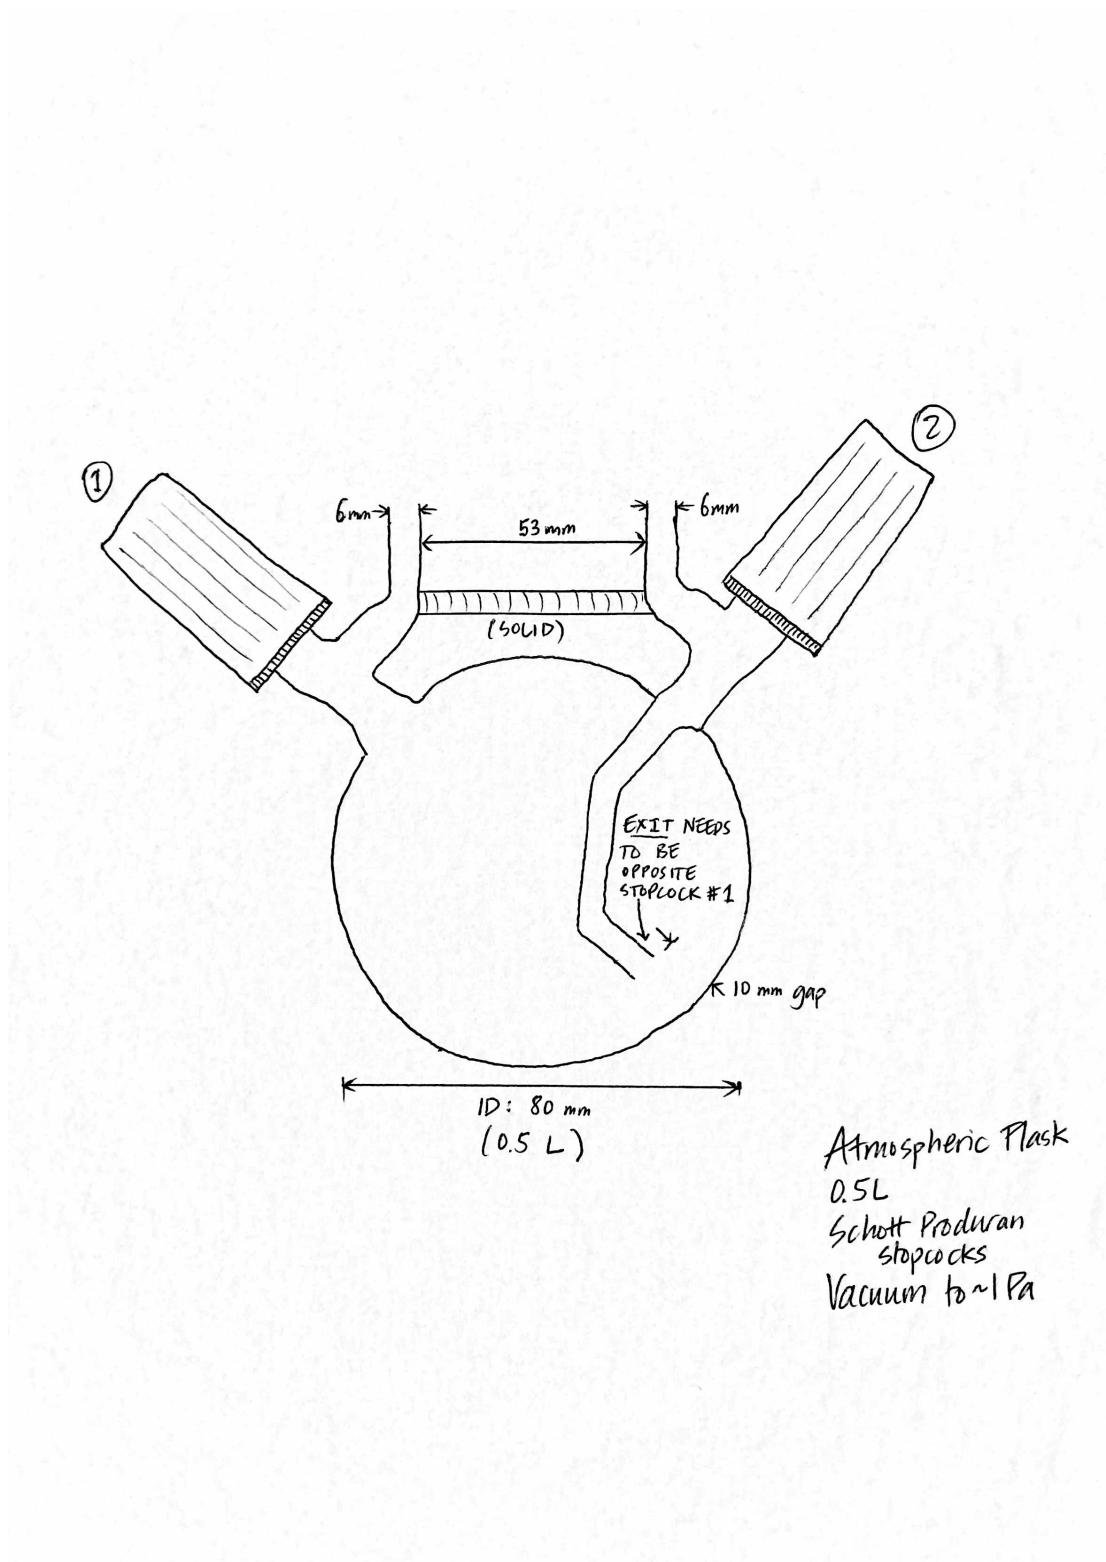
Rough sketch of MV1 Removable Flask Design. J. Young high vacuum stopcocks can also be substituted for Schott Produran.
